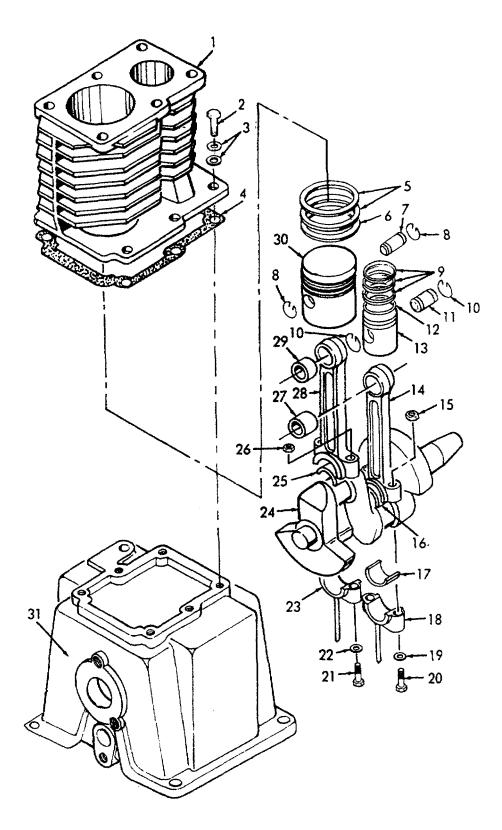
Compressor Pistons and Connecting Rods, Installation.
